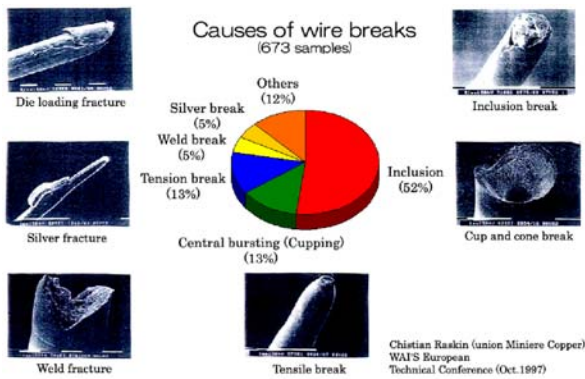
Causes of wire breakage while copper wire drawing ⁽³⁾.
